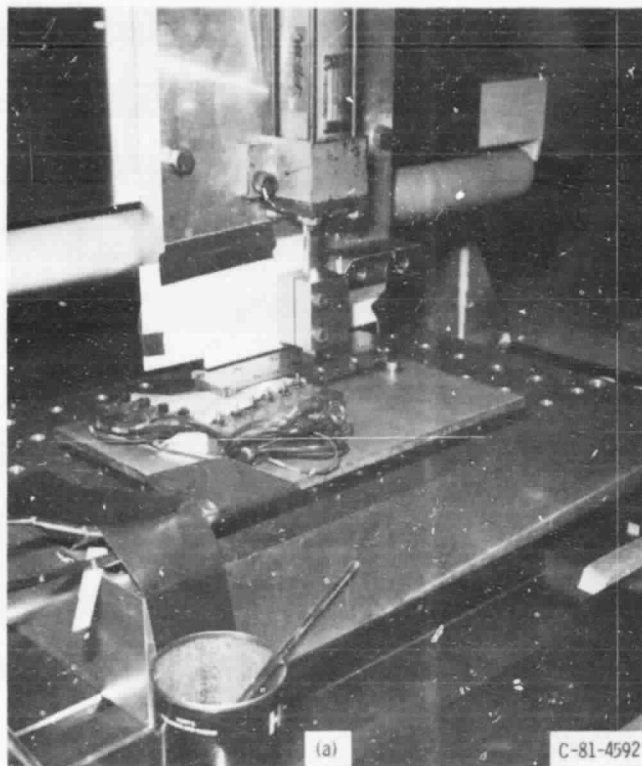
Photograph of test apparatus mounted on a NC-machine.
